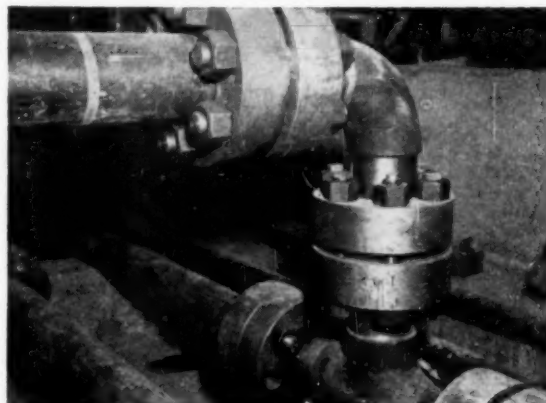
FLANGED ELL AND TEE ASSEMBLY
